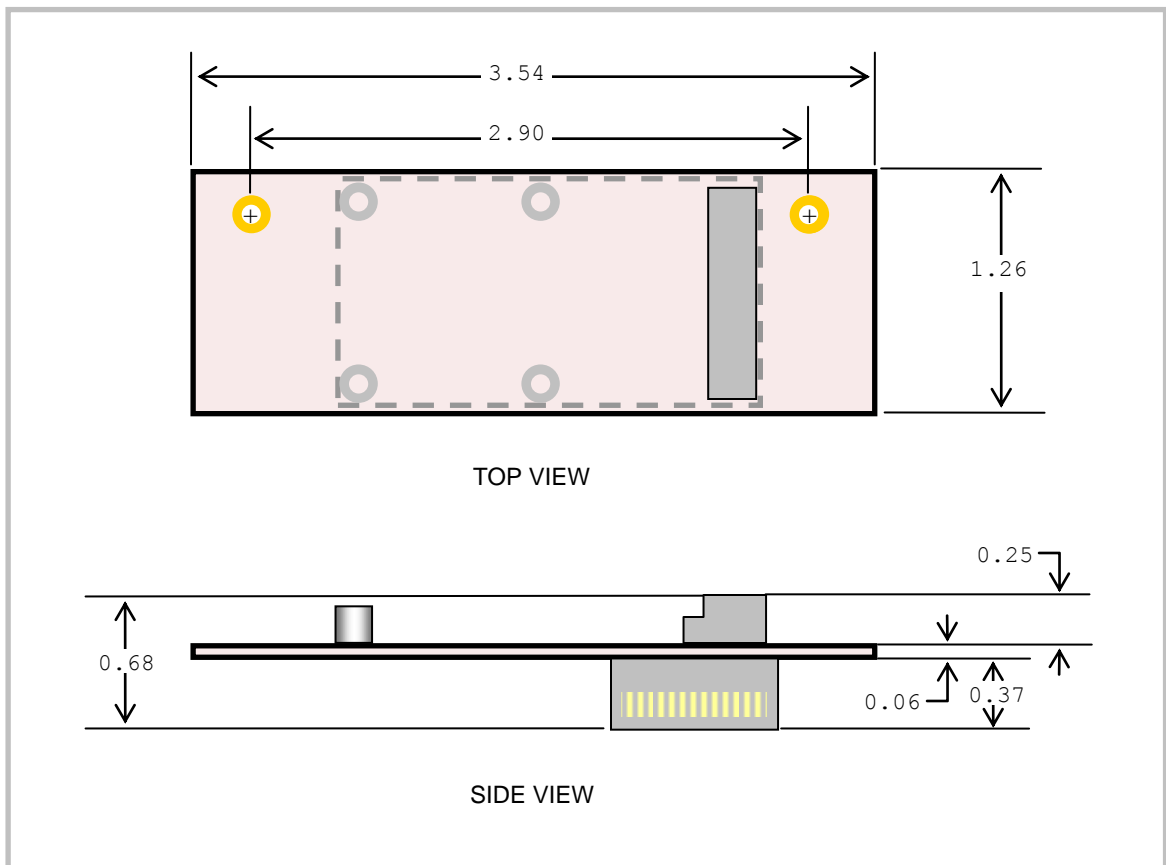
VL-EPHs-P1 Dimensions and Mounting Holes
